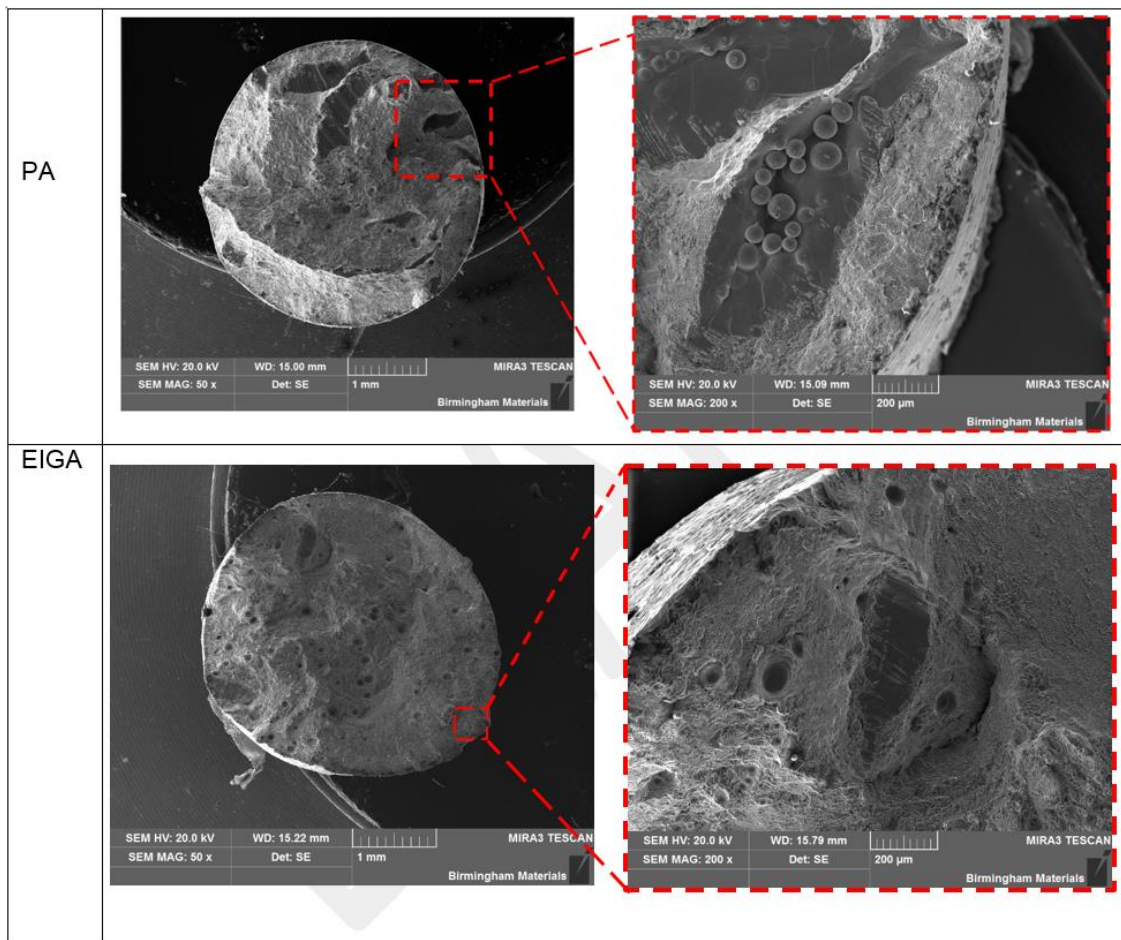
Fracture analysis of as-built test specimens PA samples with lack of fusion defects and while spherical pores for EIGA pores
